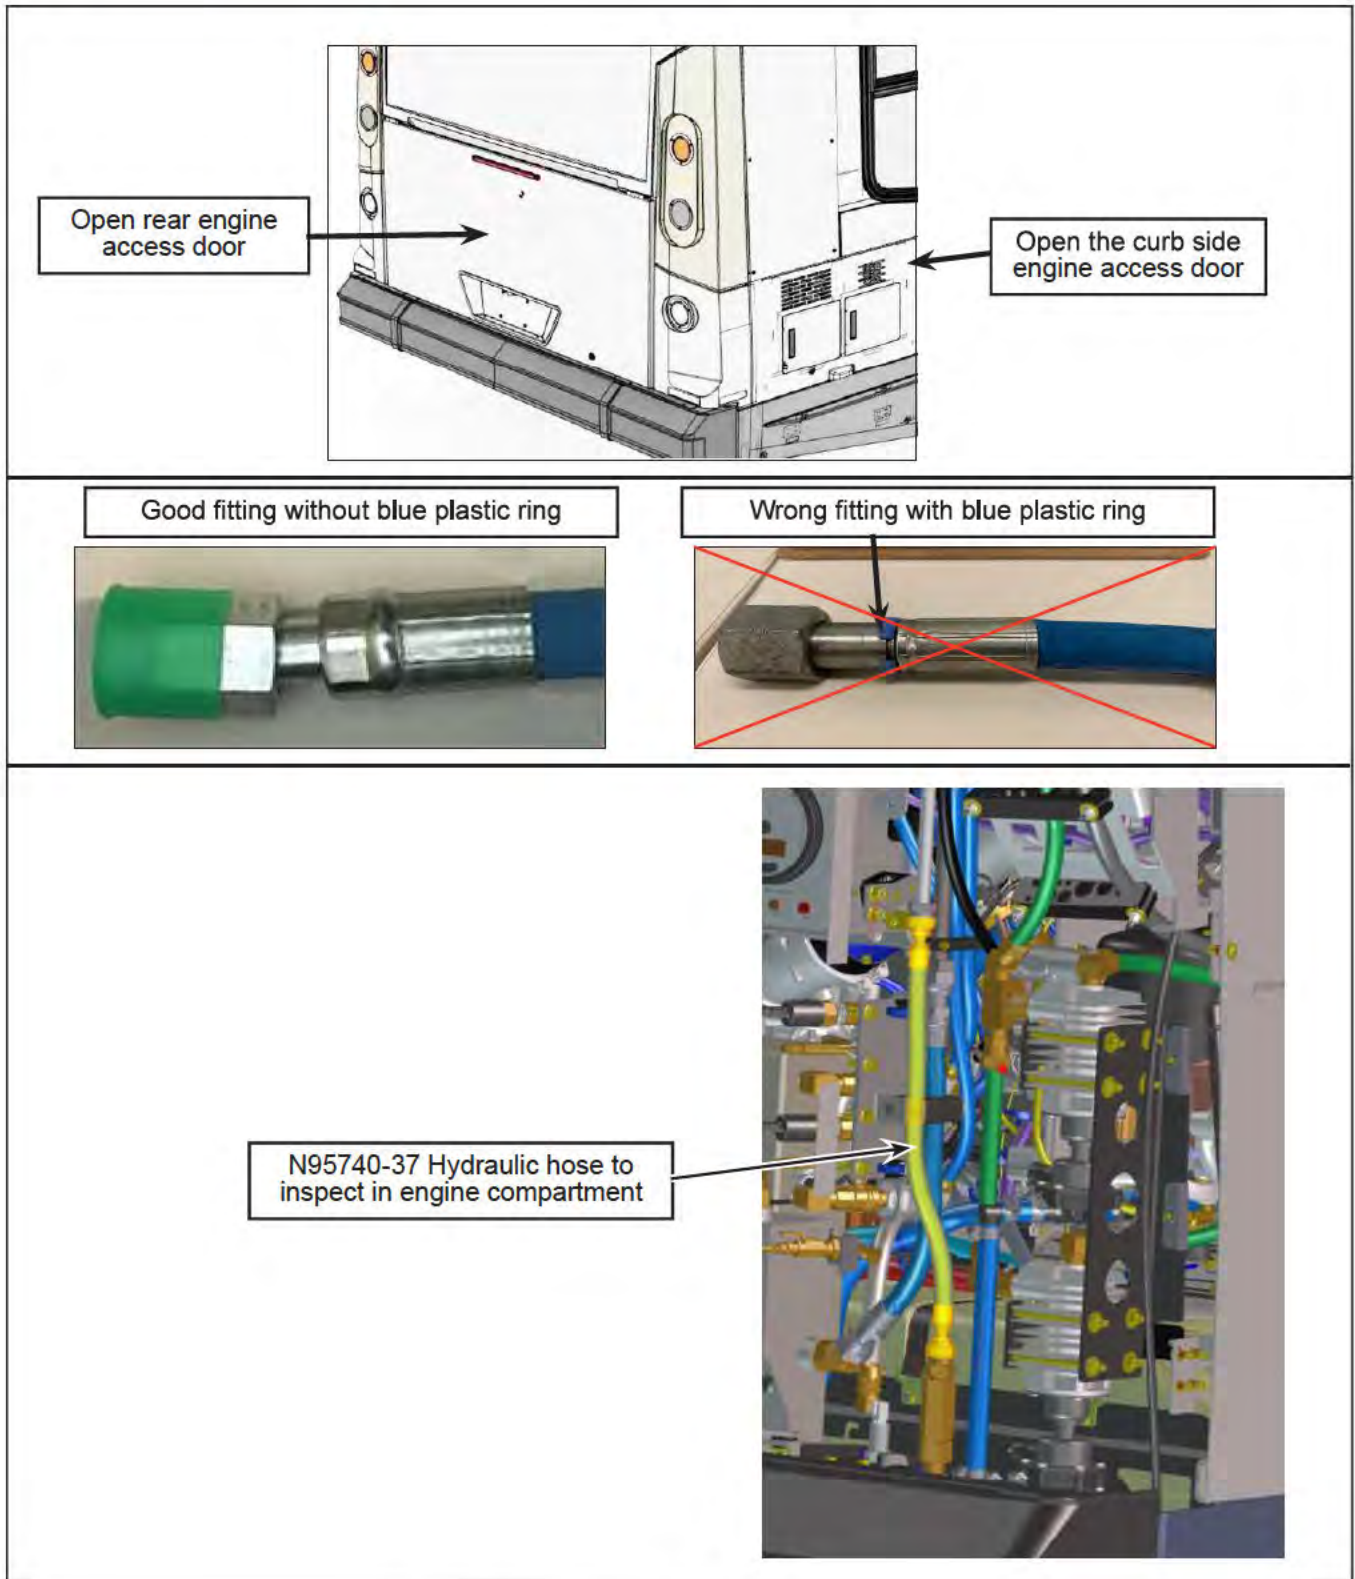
Hydraulic hose N95740-37 fitting inspection
